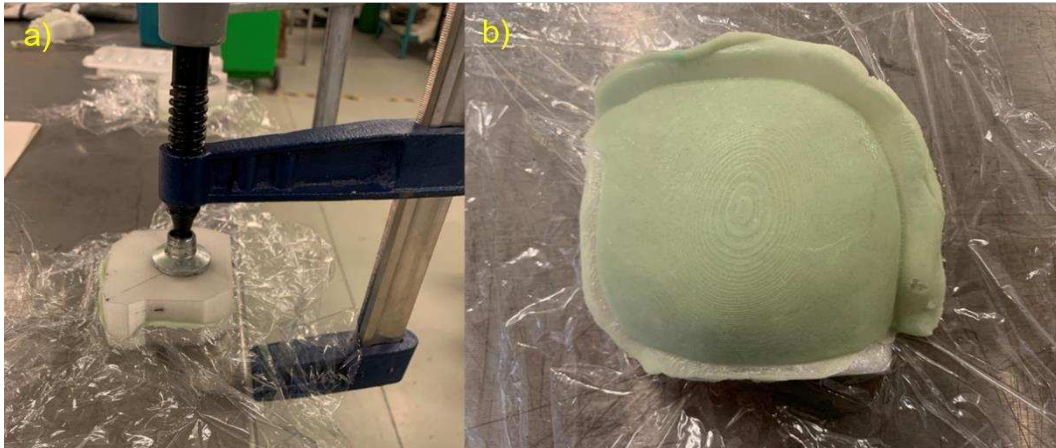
Pictures of the manufacturing of the bone cement samples using the 3D-printed mold.
